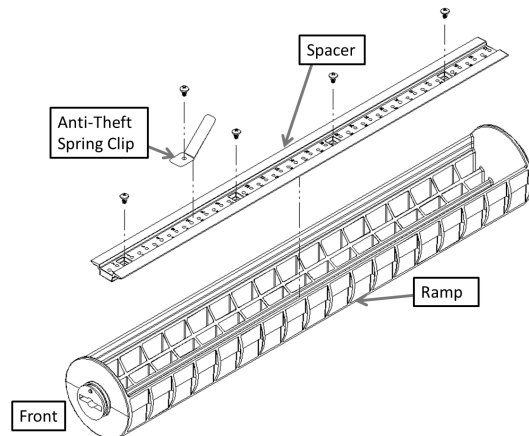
Rotor Spacer, and Anti-theft Spring Clip
